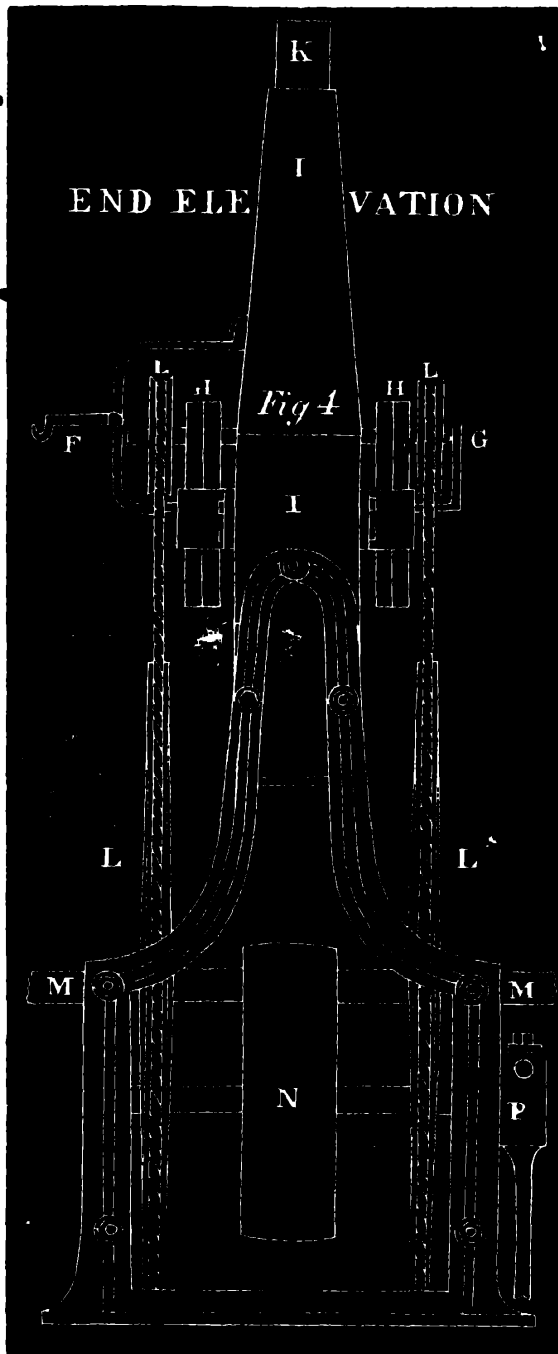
(see front page) is an elevation of the whole engine, steam case, framing and driving drums, and fig. 4 is an end view of the same. The engine spindle is mounted, and revolves upon two pair of anti-friction wheels H H, fixed to the steam case I I, in which the engine revolves, and which case is for the purpose of taking off the steam by the tube K, to the chimney or other outlet from the building; the power is conveyed from the engine shaft by two pulleys fixed upon it, to two drum wheels, by
